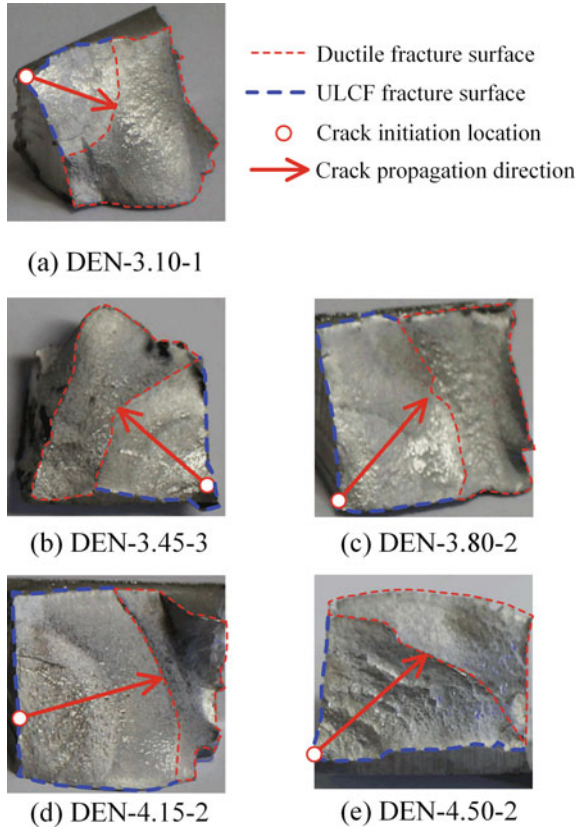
Macro-fracture surfaces of DEN specimens
